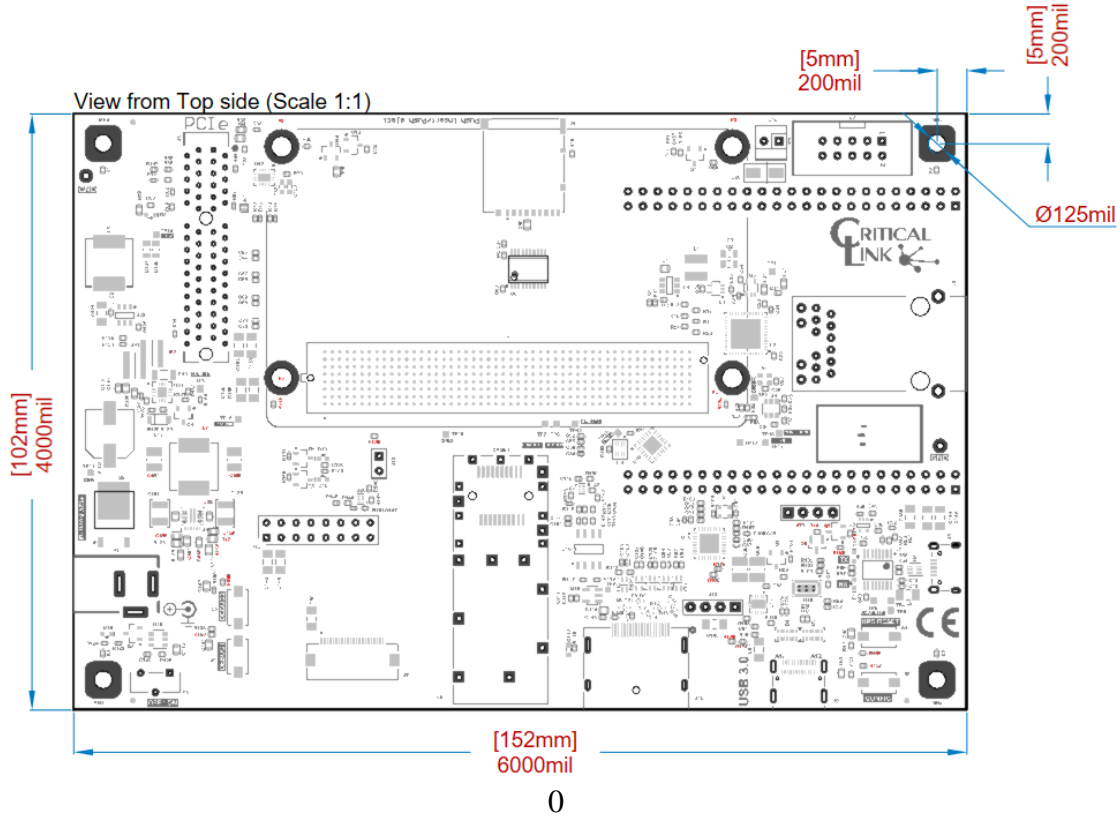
MitySOM-A5E Mini Development Kit Outline and Mounting Hole Locations (Top View)
